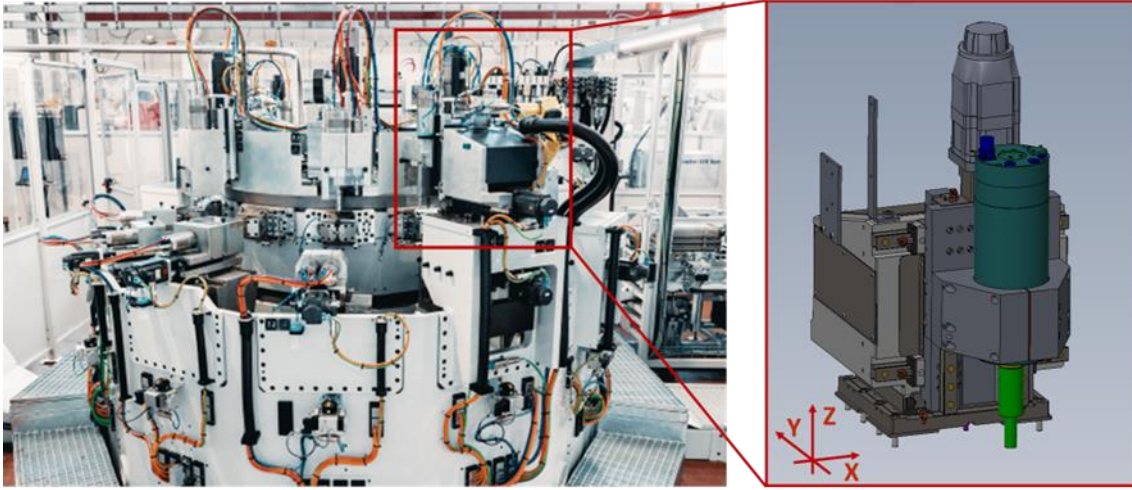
The studied transfer machine and a single 3 axis CNC operative unit.
